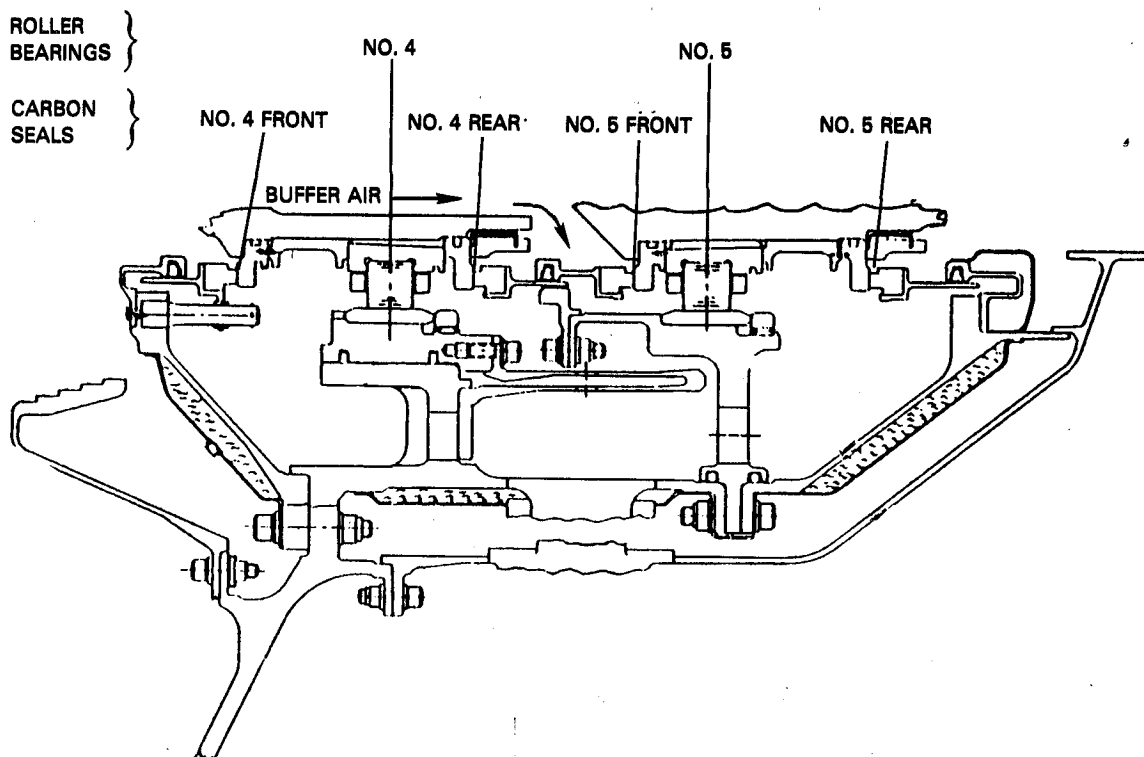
Nos. 4 and 5 Bearing Compartment Bearing and Seal Arrangement
